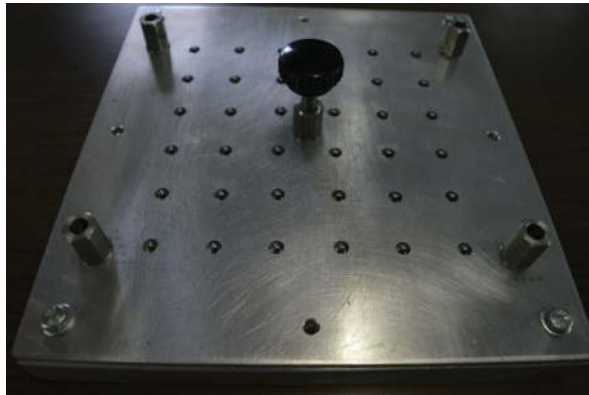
Sample holder used to build ring-shaped samples of nanocomposite having dimensions of 3 mm and 7 mm for inner and outer diameter respectively.
